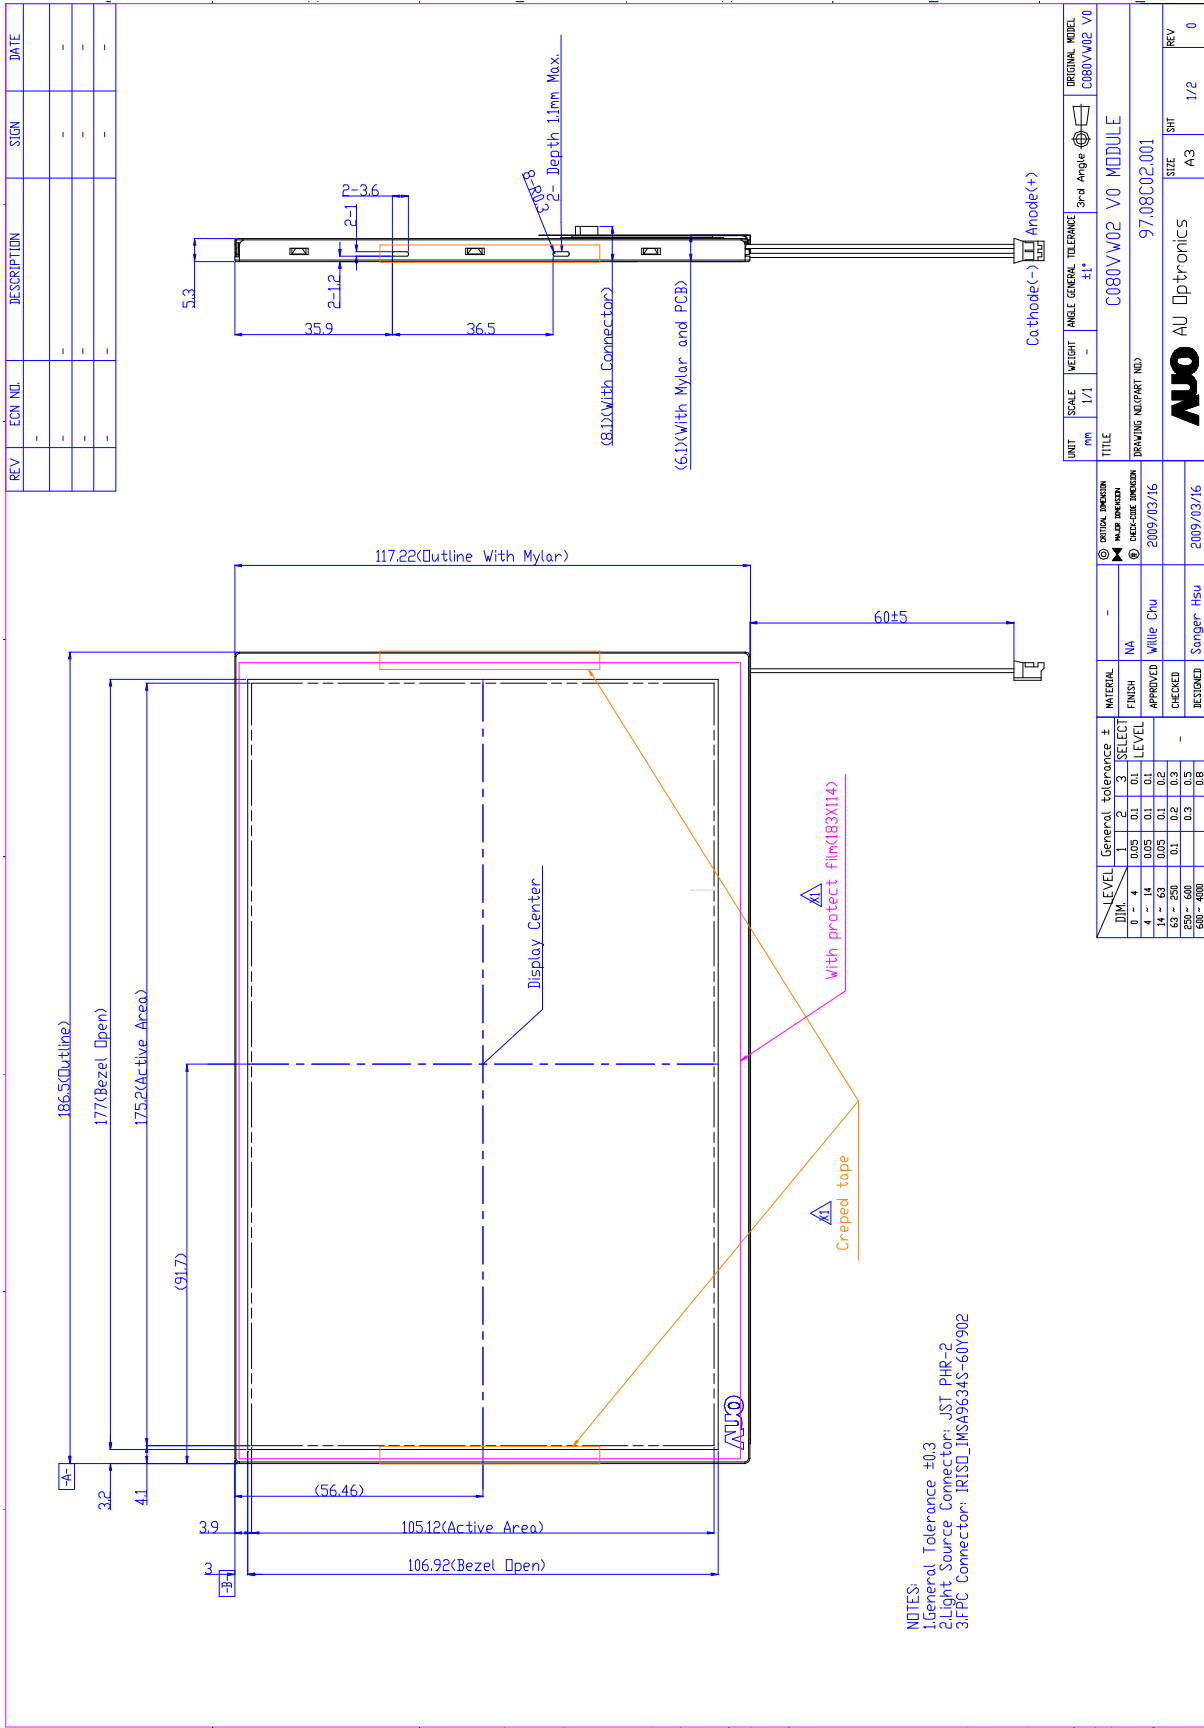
a Outline dimension of TFT-LCD module (Front View)
